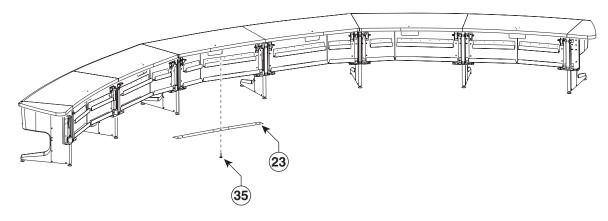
Section 1 Privacy Panel Alignment Bracket
